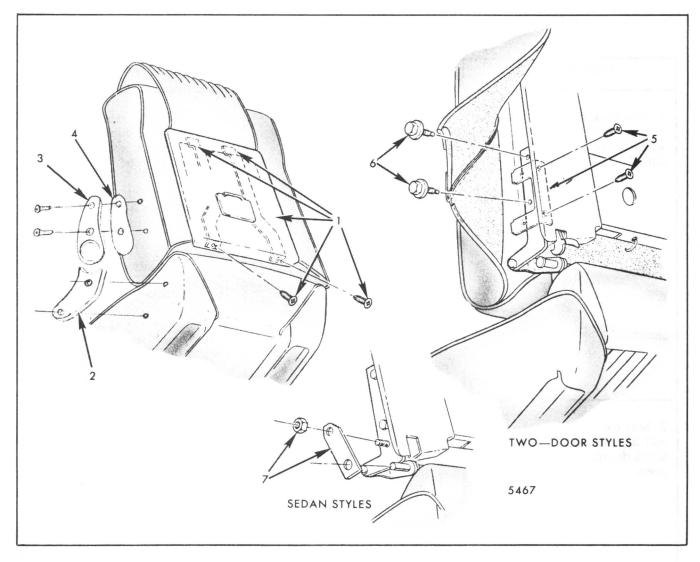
Salon Bucket Seat Reclining Back Hinge - Passenger Seat Shown - Oldsmobile "A" Styles
